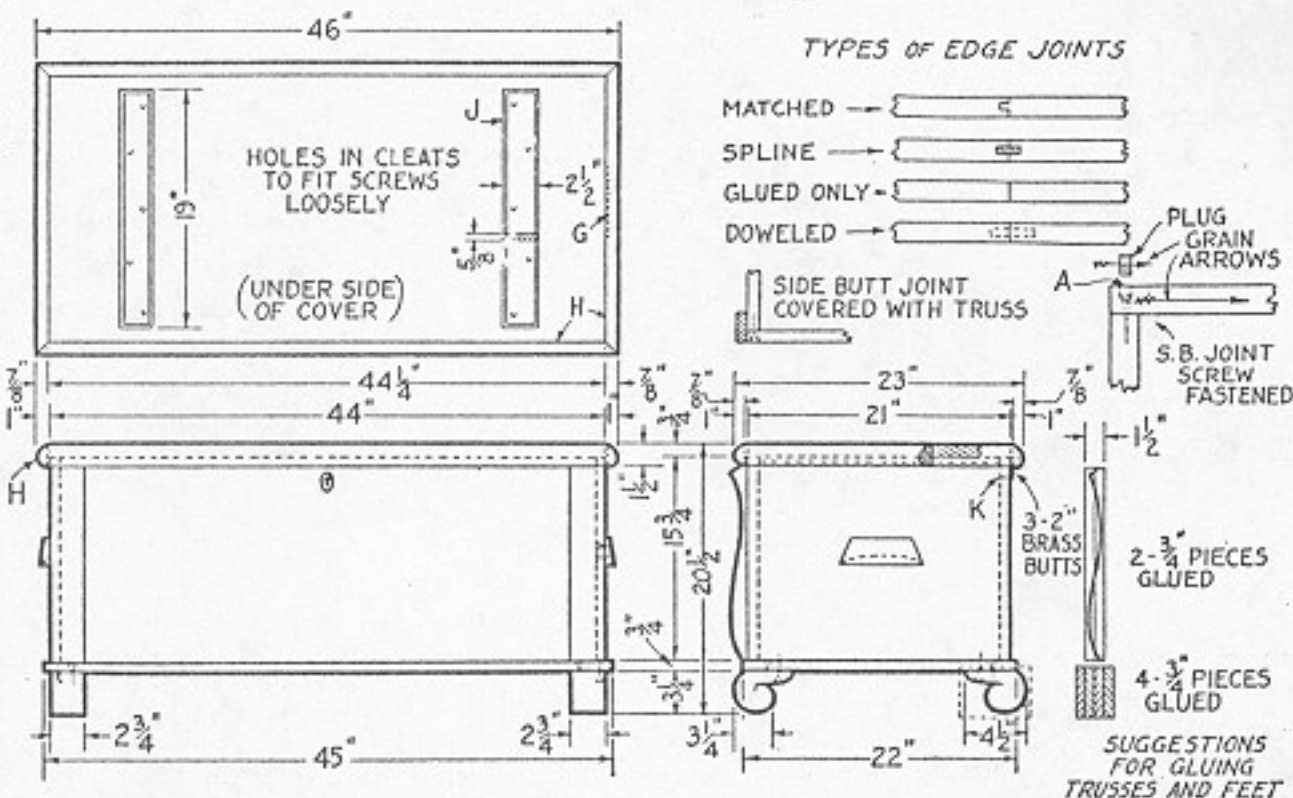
Colonial chest with various types of edge joints—matched, splined, butted and glued, doweled, and two kinds of side-butt and screwed joints. Any of these can be used, of course, in making any type of chest.
